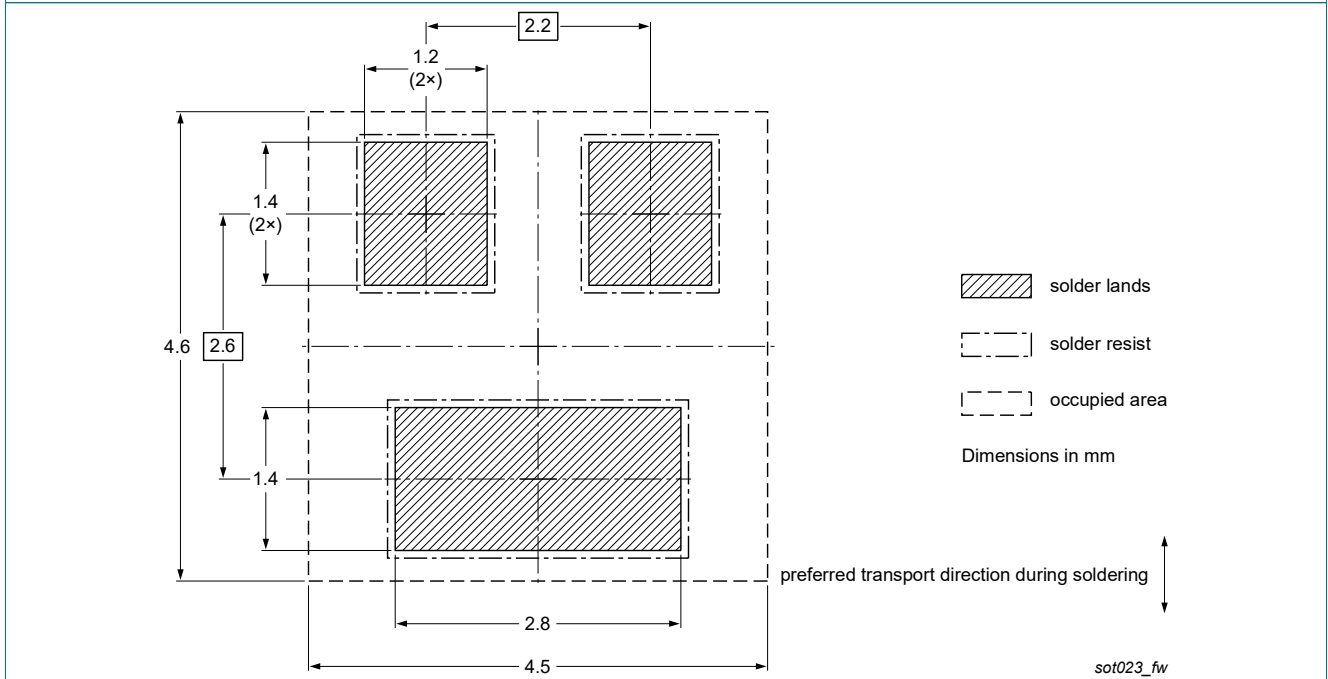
Wave soldering footprint SOT23 (TO-236AB)
